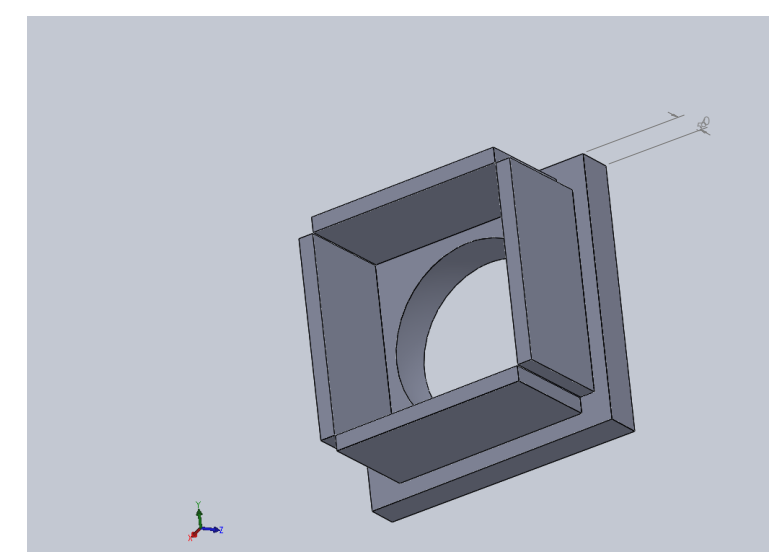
An eye piece designed in SolidWorks to hold the target for imaging. Prototype is fabricated with a 3D printer, and tested in the imaging experiment.
